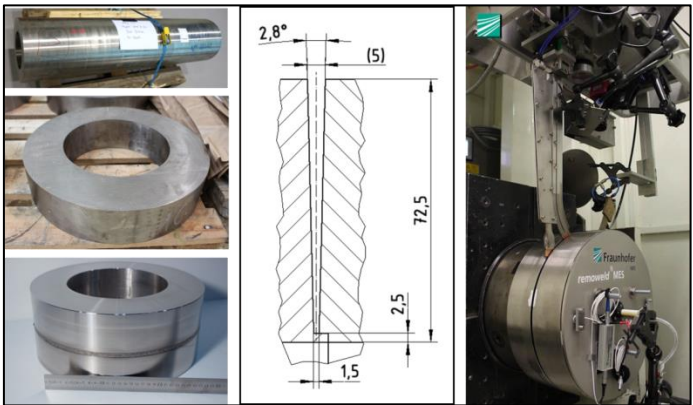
Overview – left: pipe and pipe elements; middle: weld seam preparation; right: experimental set-Up.
